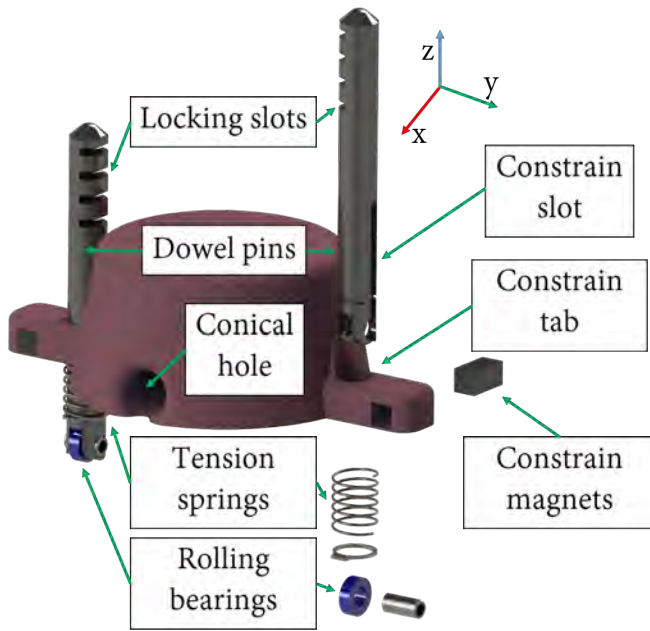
The tool component was designed to serve as the base to which a variety of tools can connect. The bottom edge of the tool component remains flat and open to installed tools and sensors. The right side of the tool component is shown here in exploded view of the dowel pin, and the left side is assembled.
